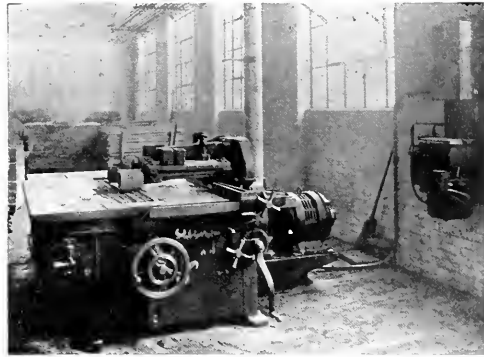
A COMPACT METHOD OF APPLYING MOTOR DRIVE AND MOUNTING CONTROL
